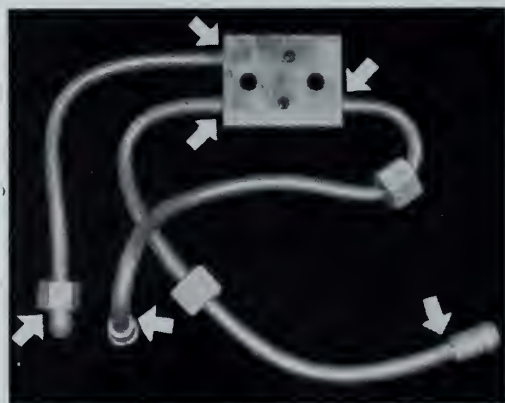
Oil cooling part for Bofors gun (silver-brazed).
